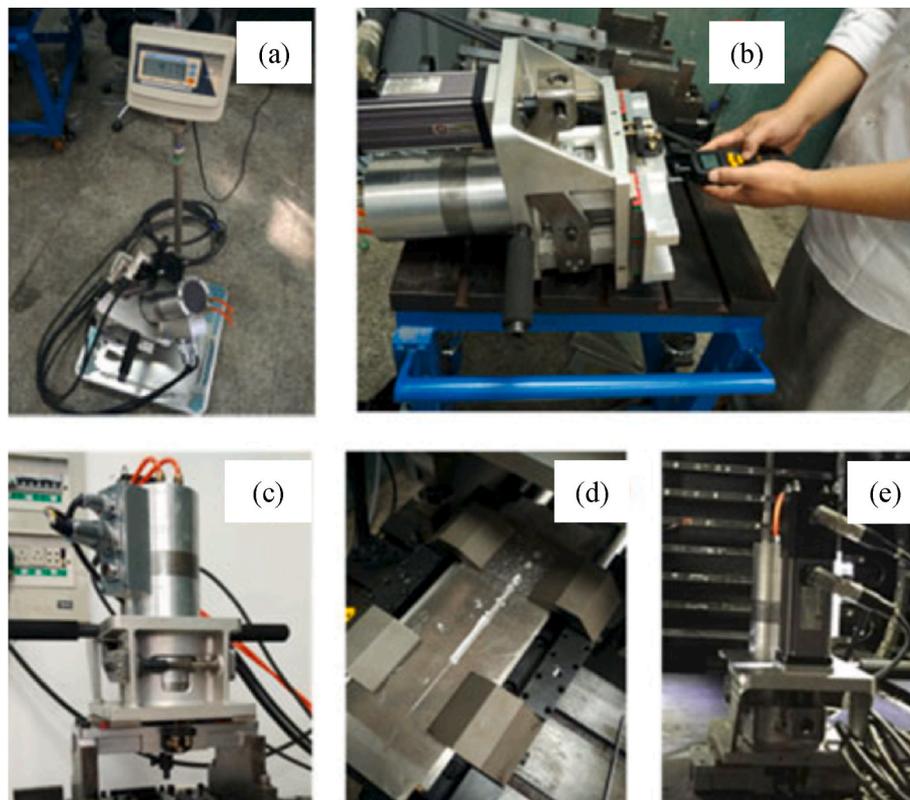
Portable FSW equipment: (a)Weight measurement, (b)rotary speed test, (c)ground weld test, (d)weld seam, and (e)test in simulated conditions [81].
